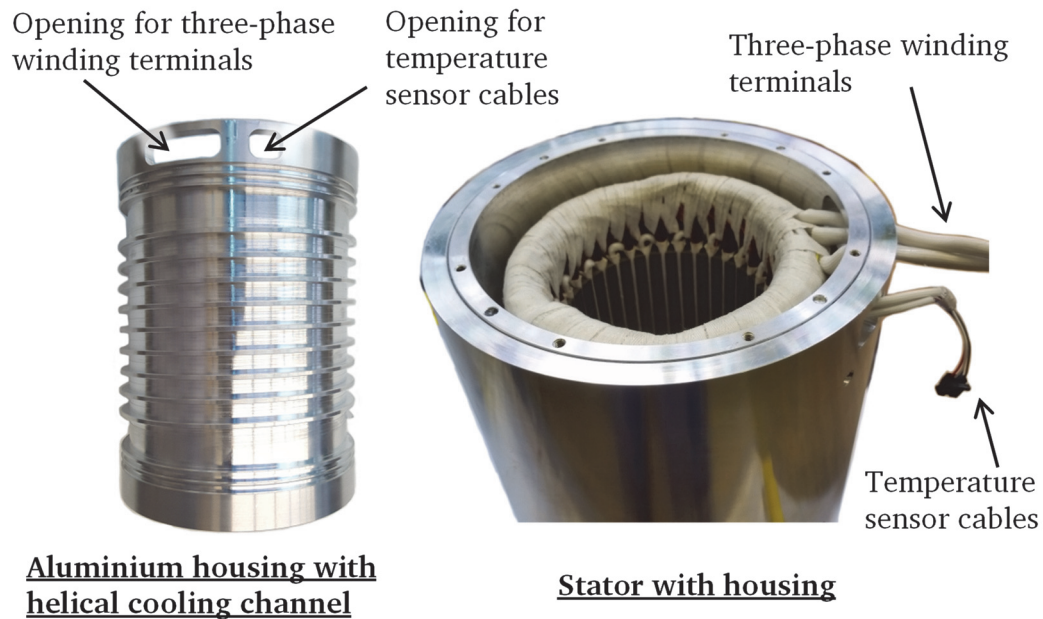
Left: Stator inner housing with helical cooling channel, Right: Stator with inner and outer housing
